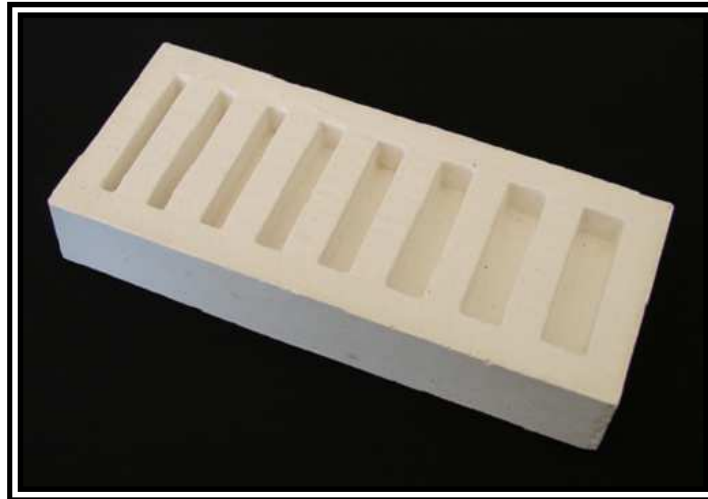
Test geometry 2 – re-test – plaster of Paris mould
